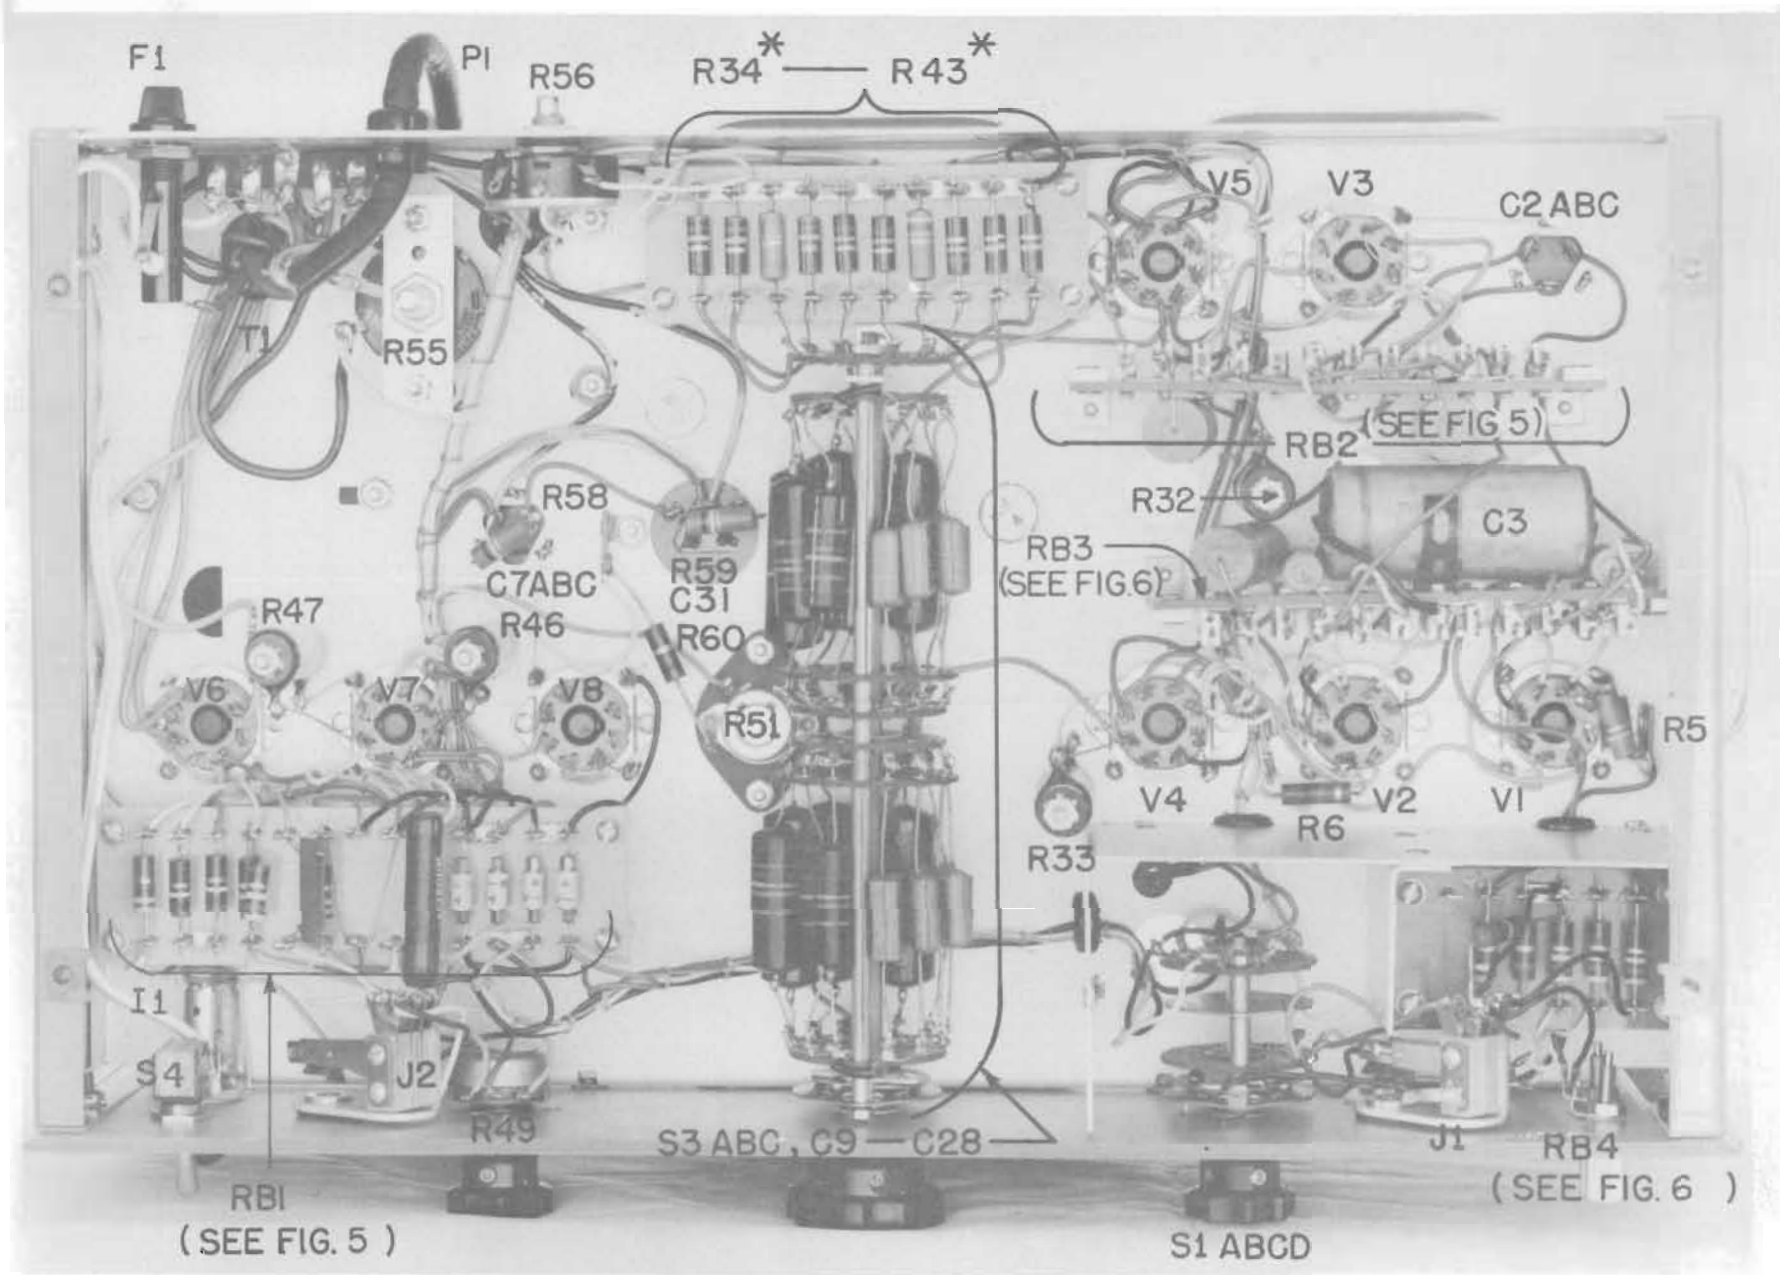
Model 500A Bottom View Bottom Plate Removed
